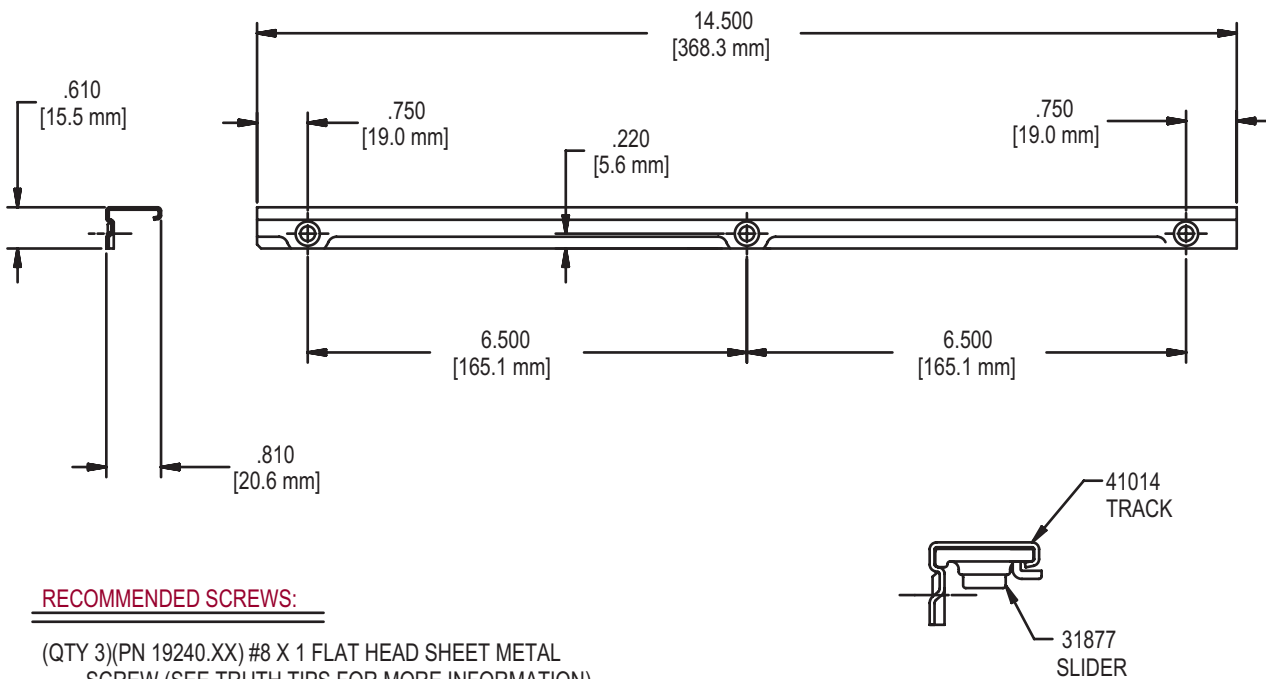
TRACK & SLIDER ASSEMBLY 11576.XX
